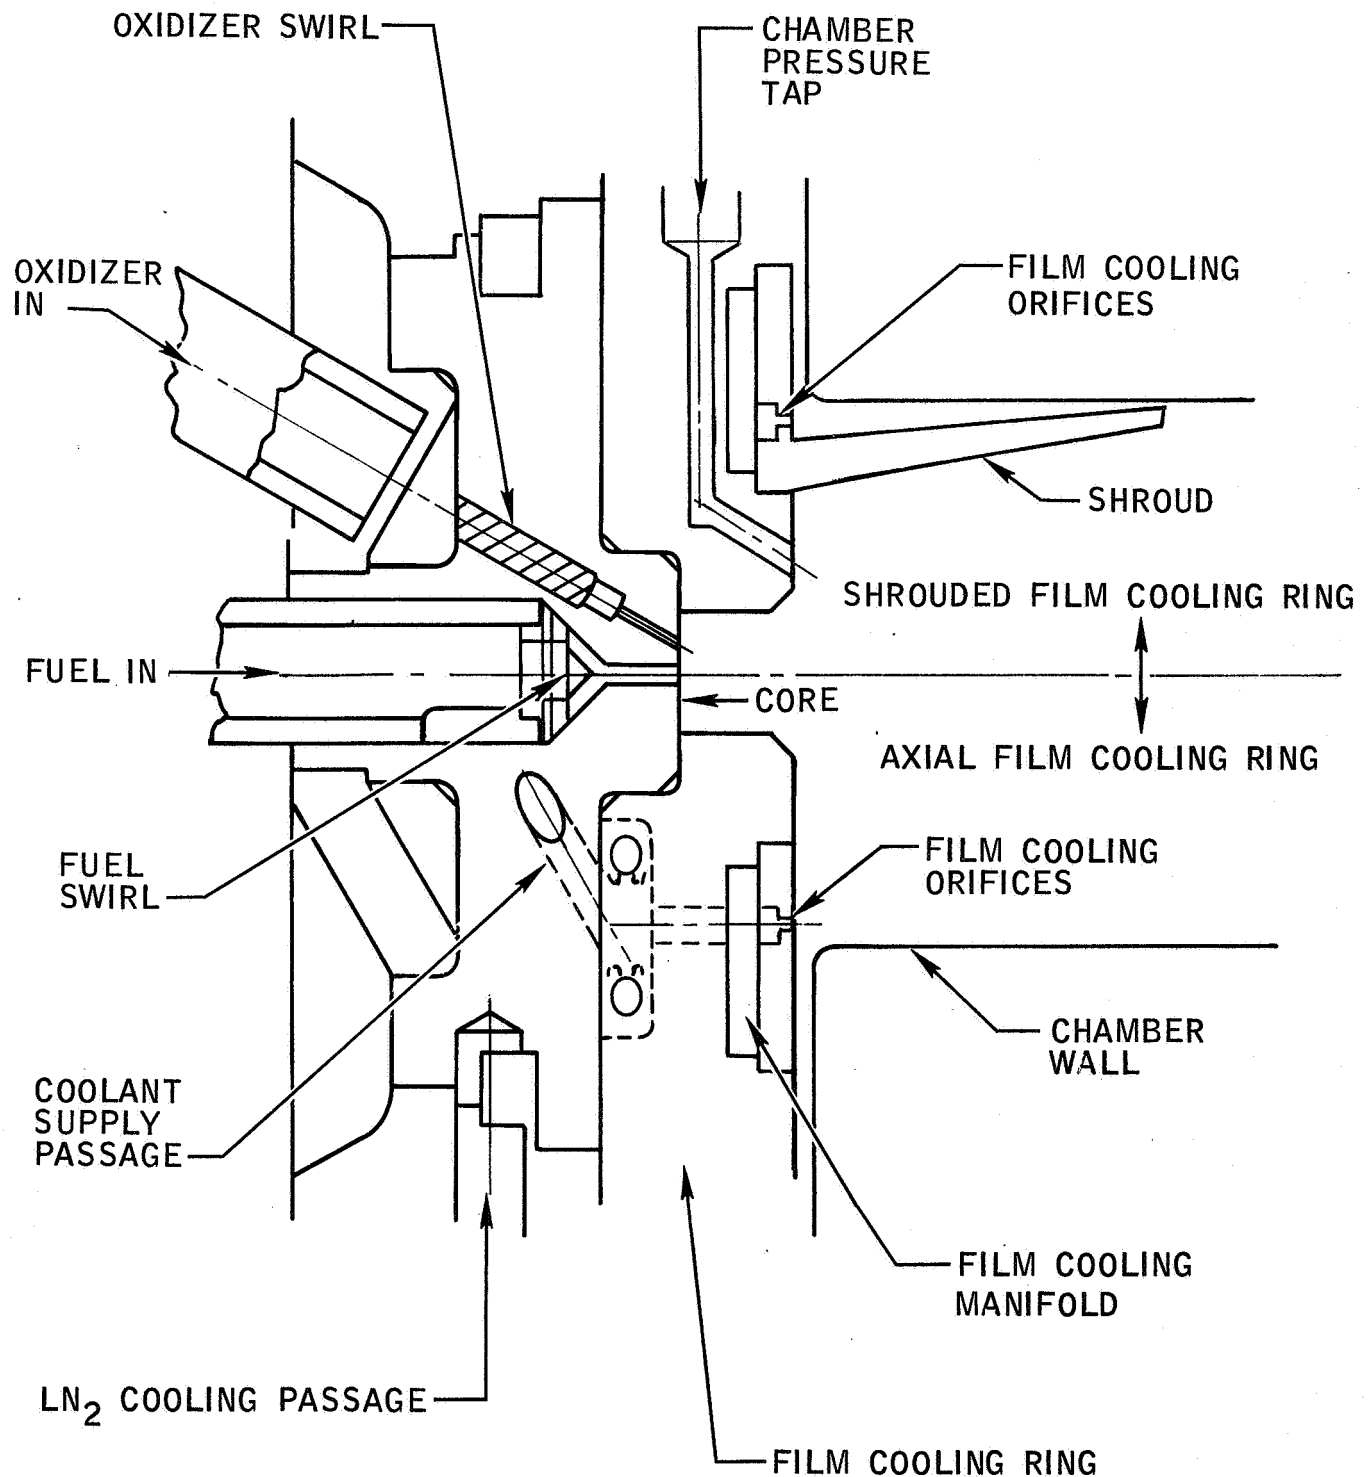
Injector Core and Film Cooling Ring Assembly
